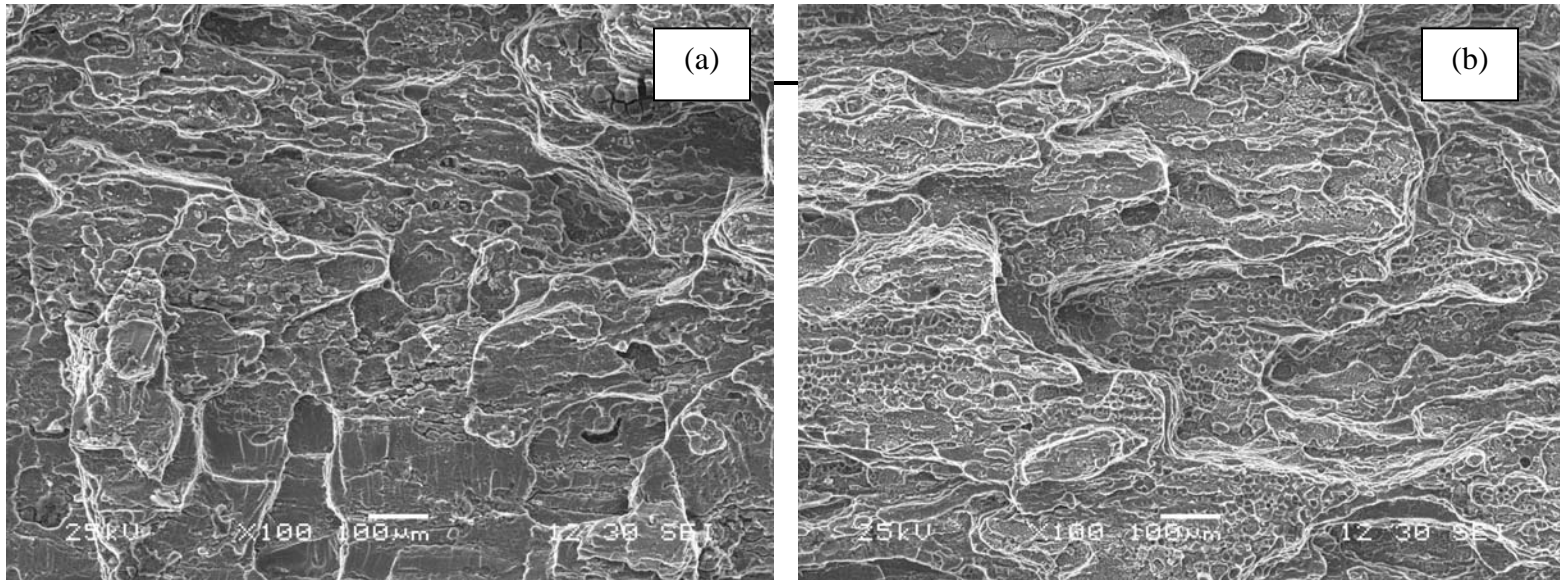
SEM fractographs showing the fatigue pre-crack /fracture interface for ST specimen 62C tested in seawater. The fatigue pre-crack fracture surface is located at the bottom of the photos.
